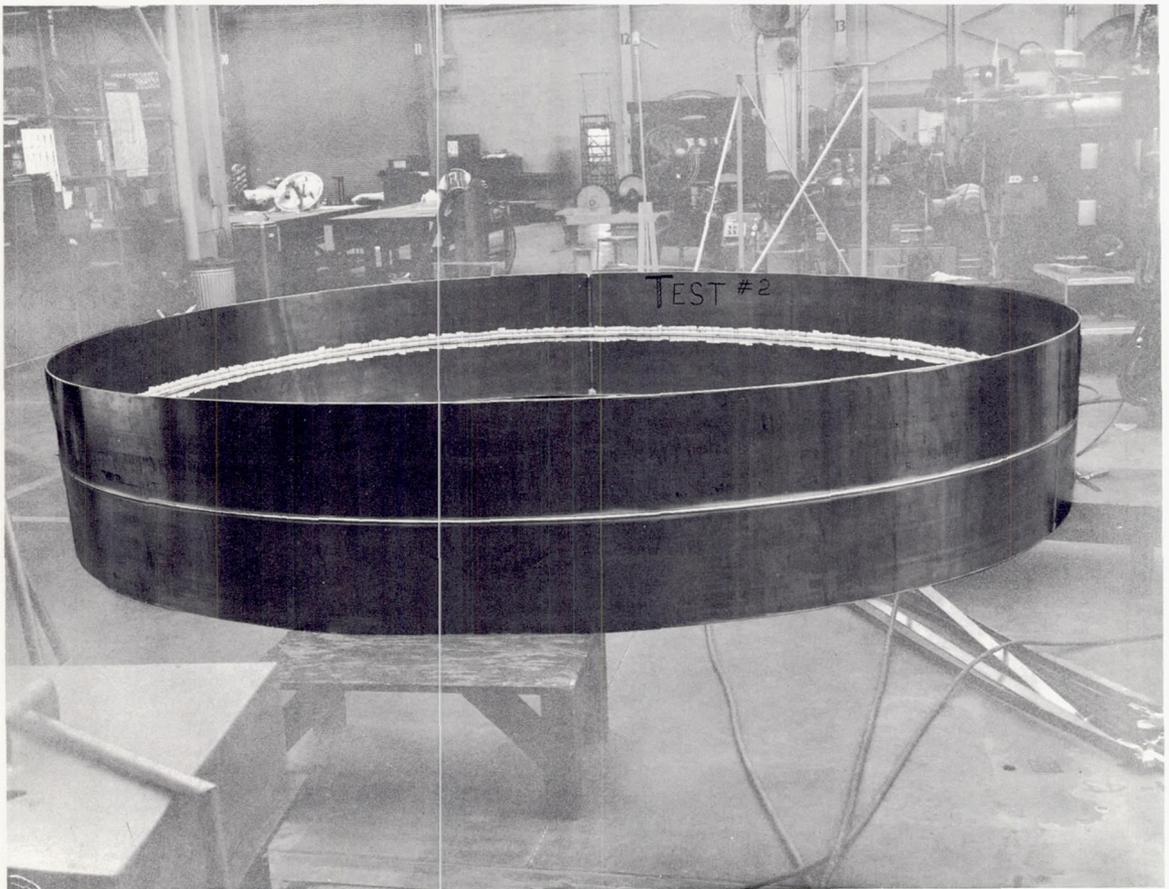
A 160-inch-diameter aluminum-alloy test sample of a tank segment welded out of position using fiber-glass backup tape. Photograph shows the finished outer bead and the tape in position.
